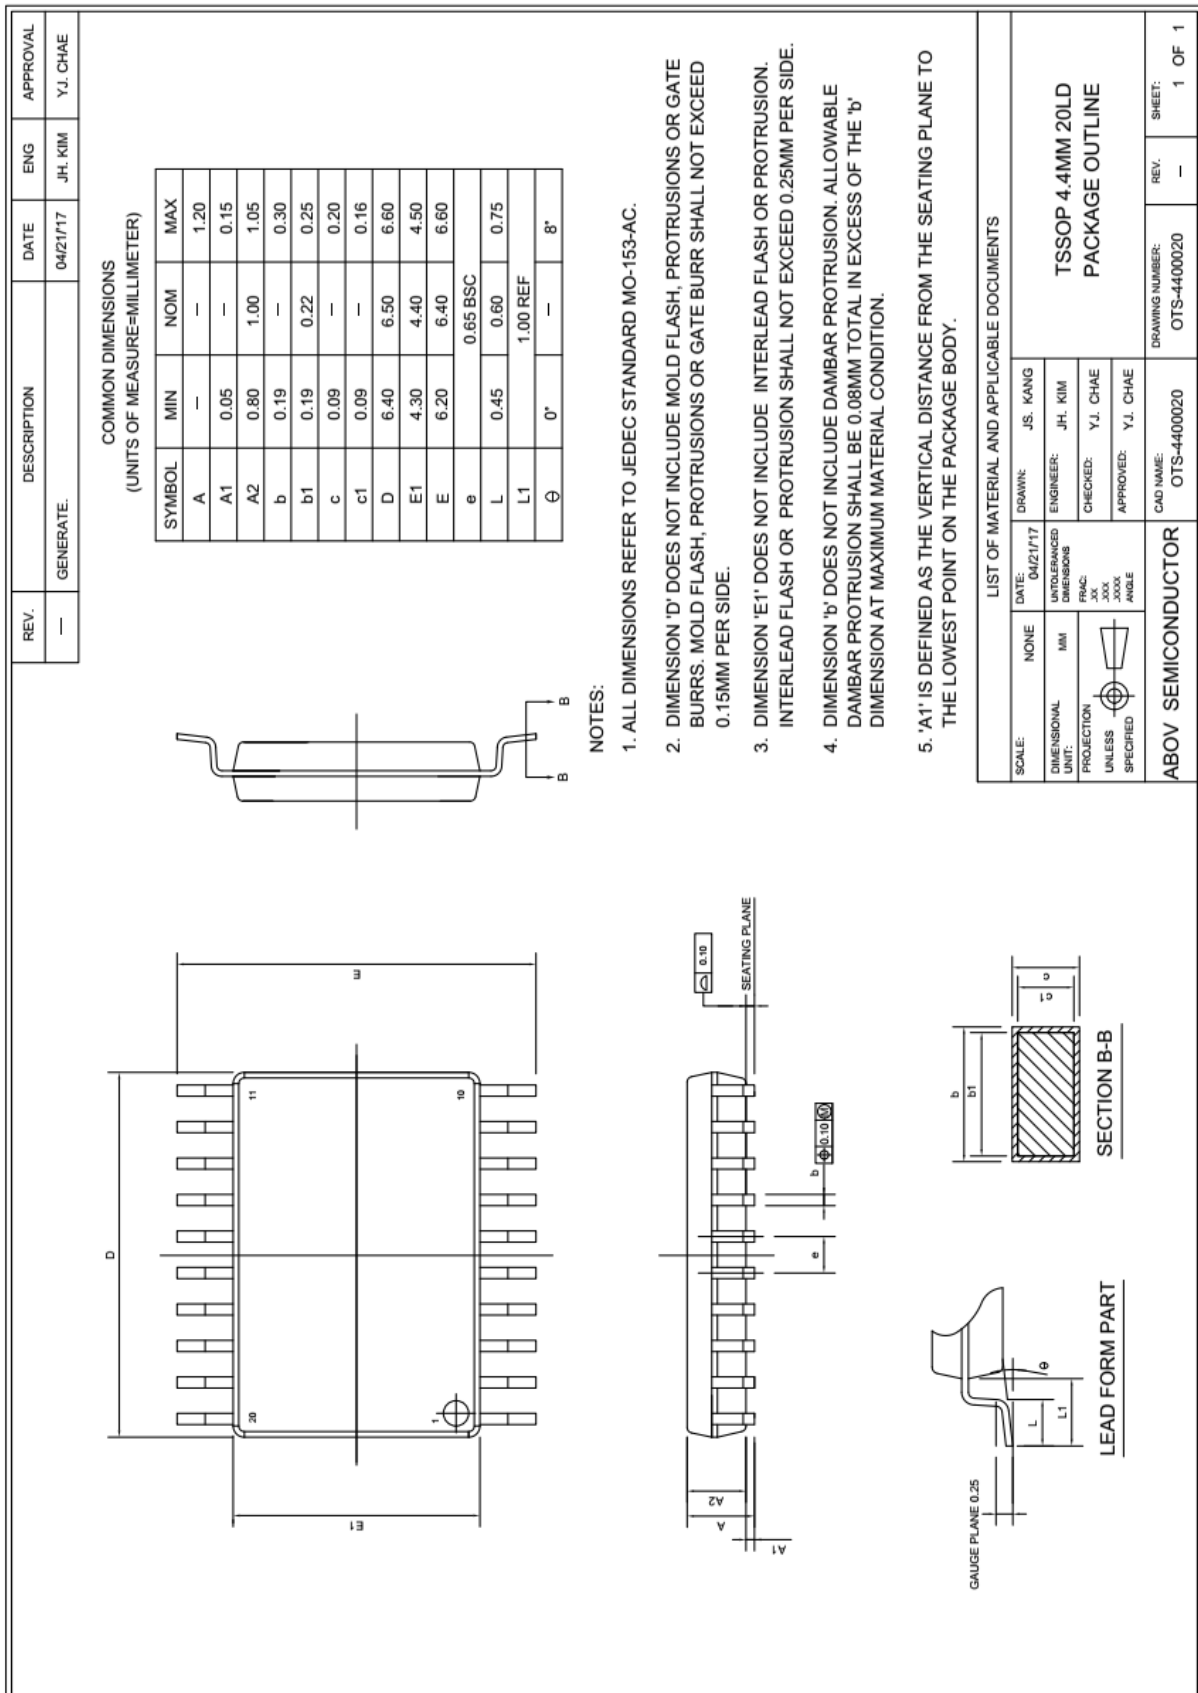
A94B114FR (20-TSSOP) Package Dimension
